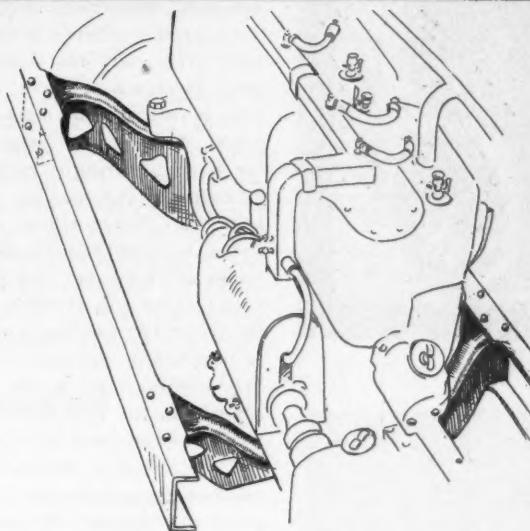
THE MOTOR IS CARRIED DIRECT ON FRAME PIECES
